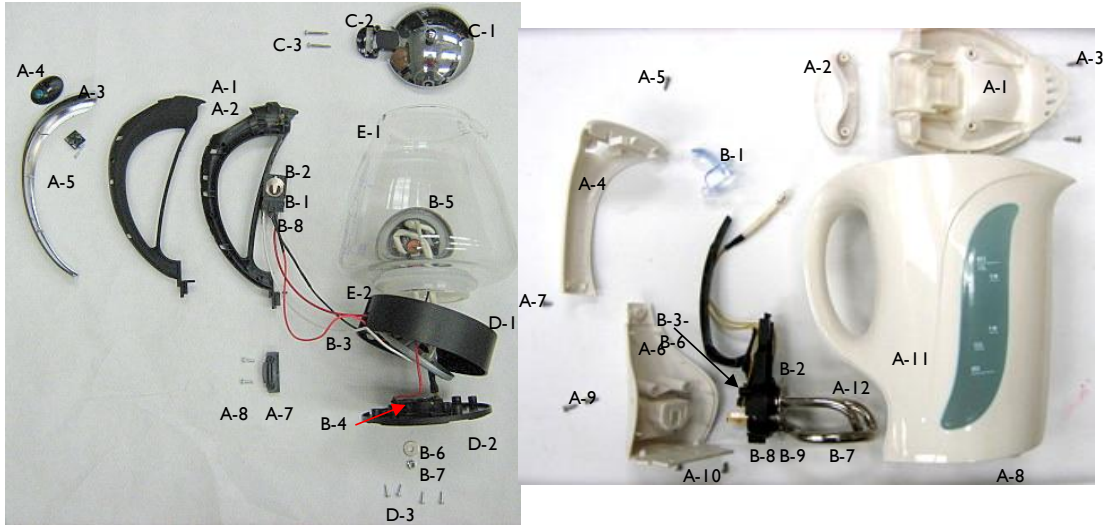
Exploded View of the Capresso and Braun Kettles Display all Major Components
